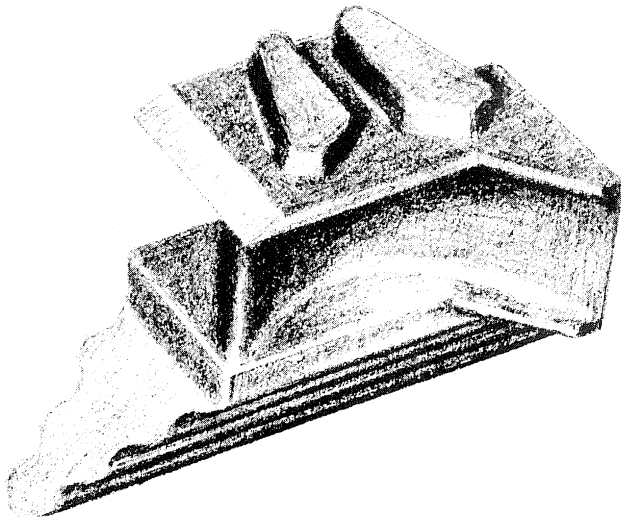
Axial Entry Blade with Double Rivets for Double Shroud [12].
